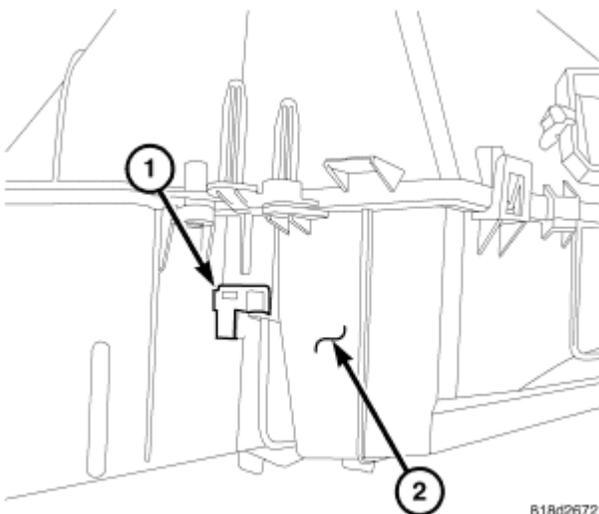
Removing/Installing Evaporator Temperature Sensor From Front Of HVAC Housing
